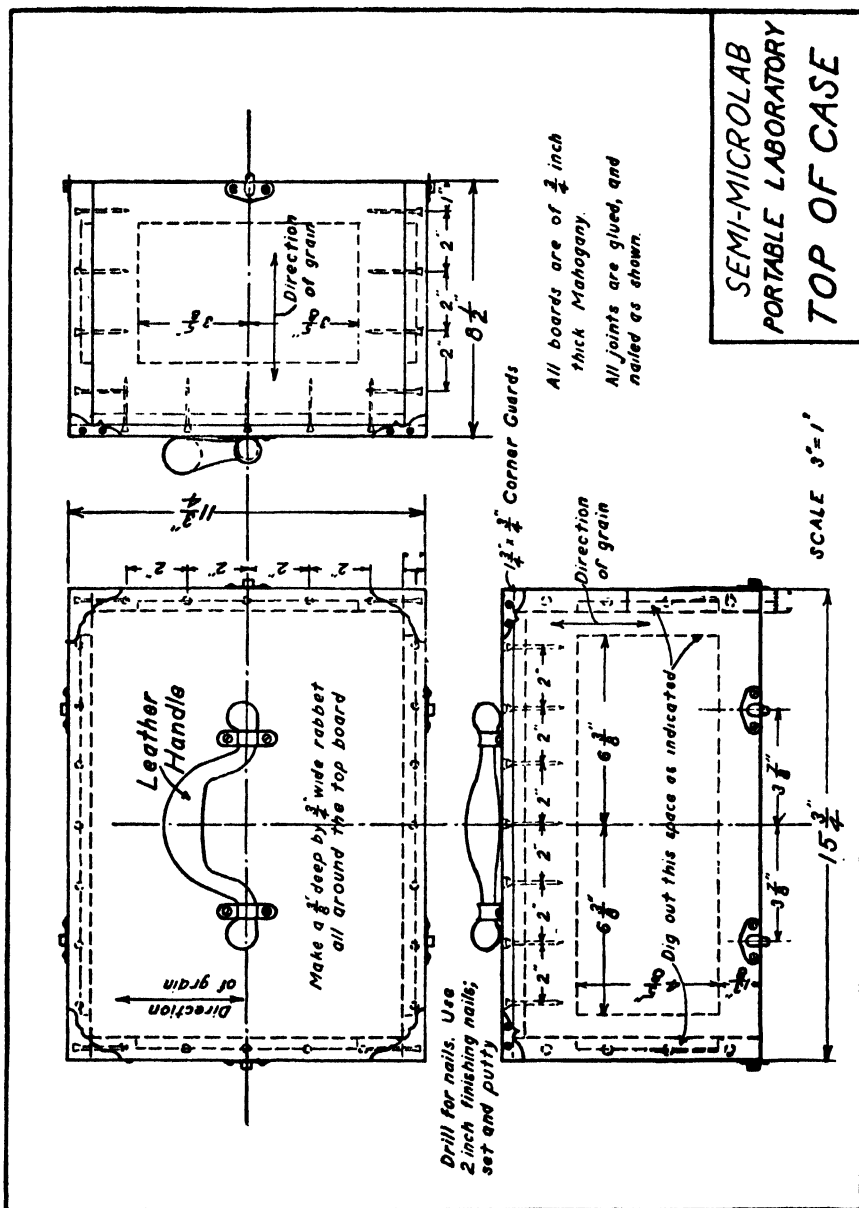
Portable Laboratory, Drawing, Top of Case.
